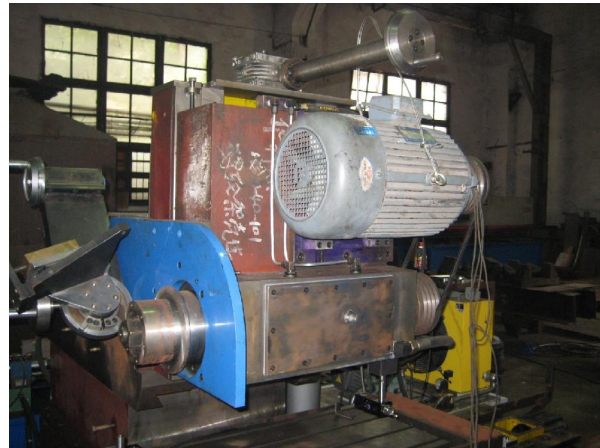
Center supported workpiece such as round broaches and gears can be ground with the plc index head which is controlled by the C axis
